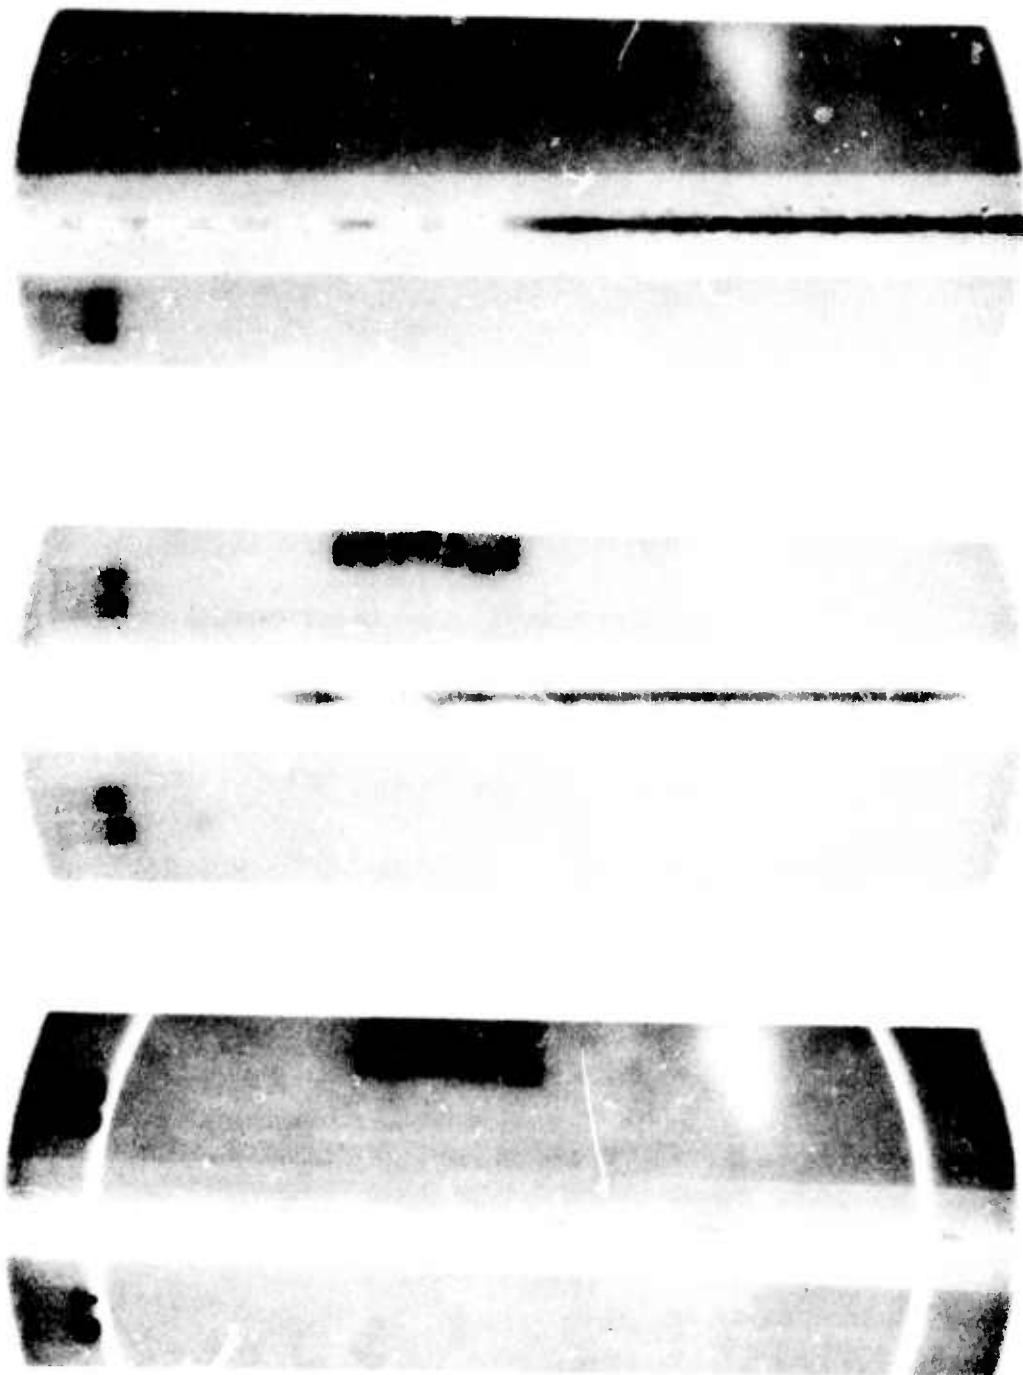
18 —Photographs of vacuum electron beam weld radiographs
